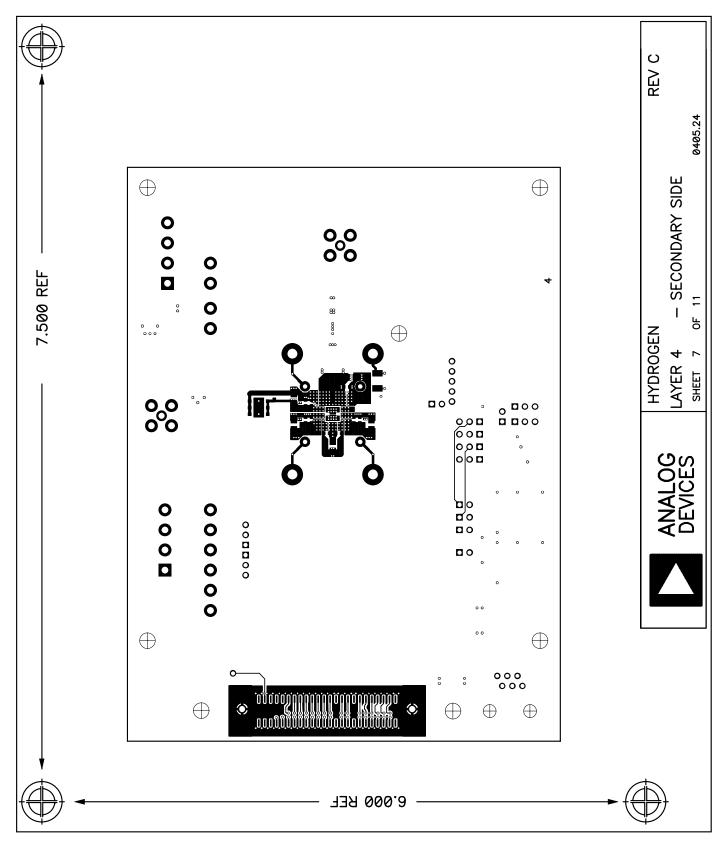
PCB Layout Layer 4, AD9736 Evaluation Board, Rev C
